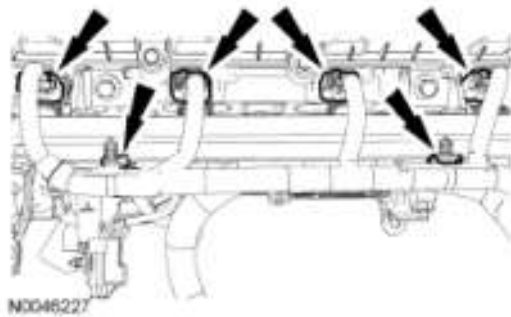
Locating Fuel Injector Electrical Connectors And Wiring Harness Pin-Type Retainers
